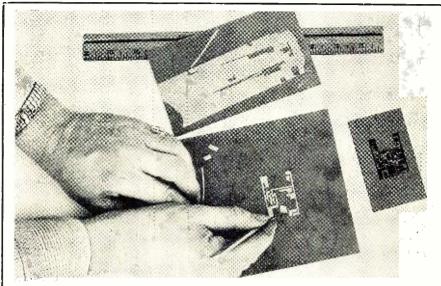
Preparing the printed circuit board. Technique can be followed at home.
